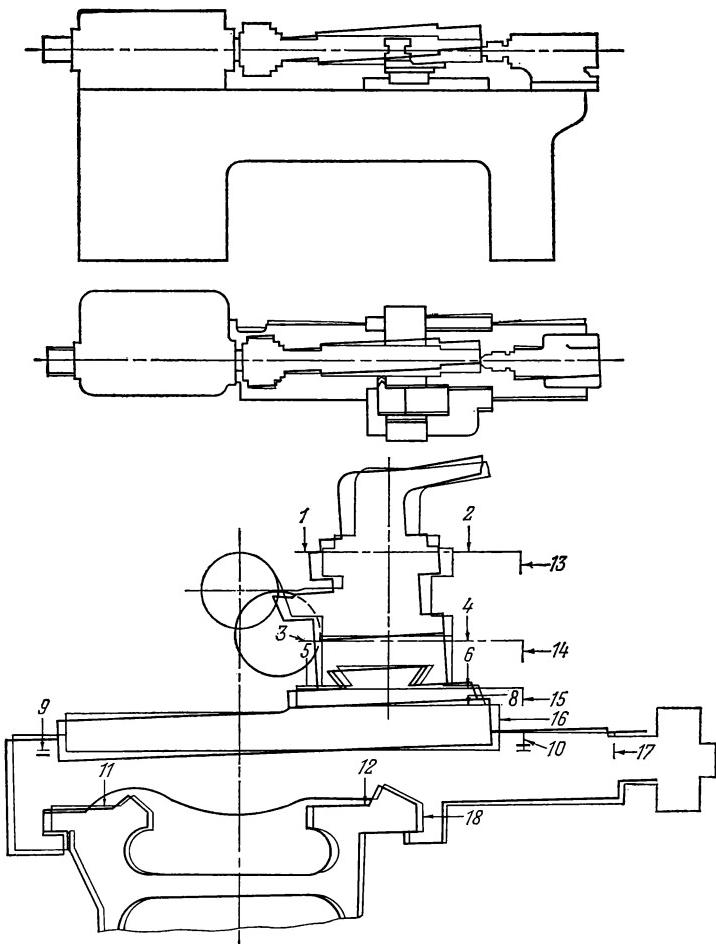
Form of vibrations of the model 1Д62М engine lathe in cutting metal (without torsional vibration)
